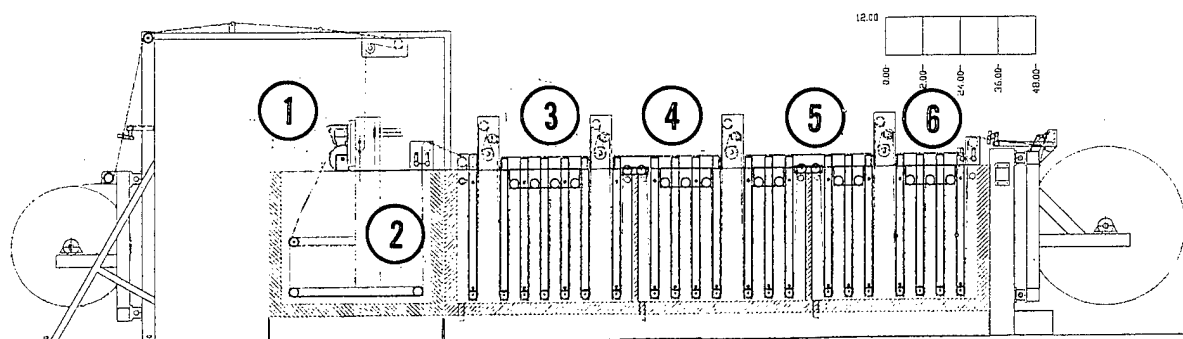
Process schematic of continuous casting machine for producing porous PS membrane by phase inversion for PA composite membrane development. (1) Knife over roll casting assembly above non-woven casting fabric, (2) Aqueous phase inversion gelation tank, and (3), (4) and (5) Water rinse tanks for solvent removal.
